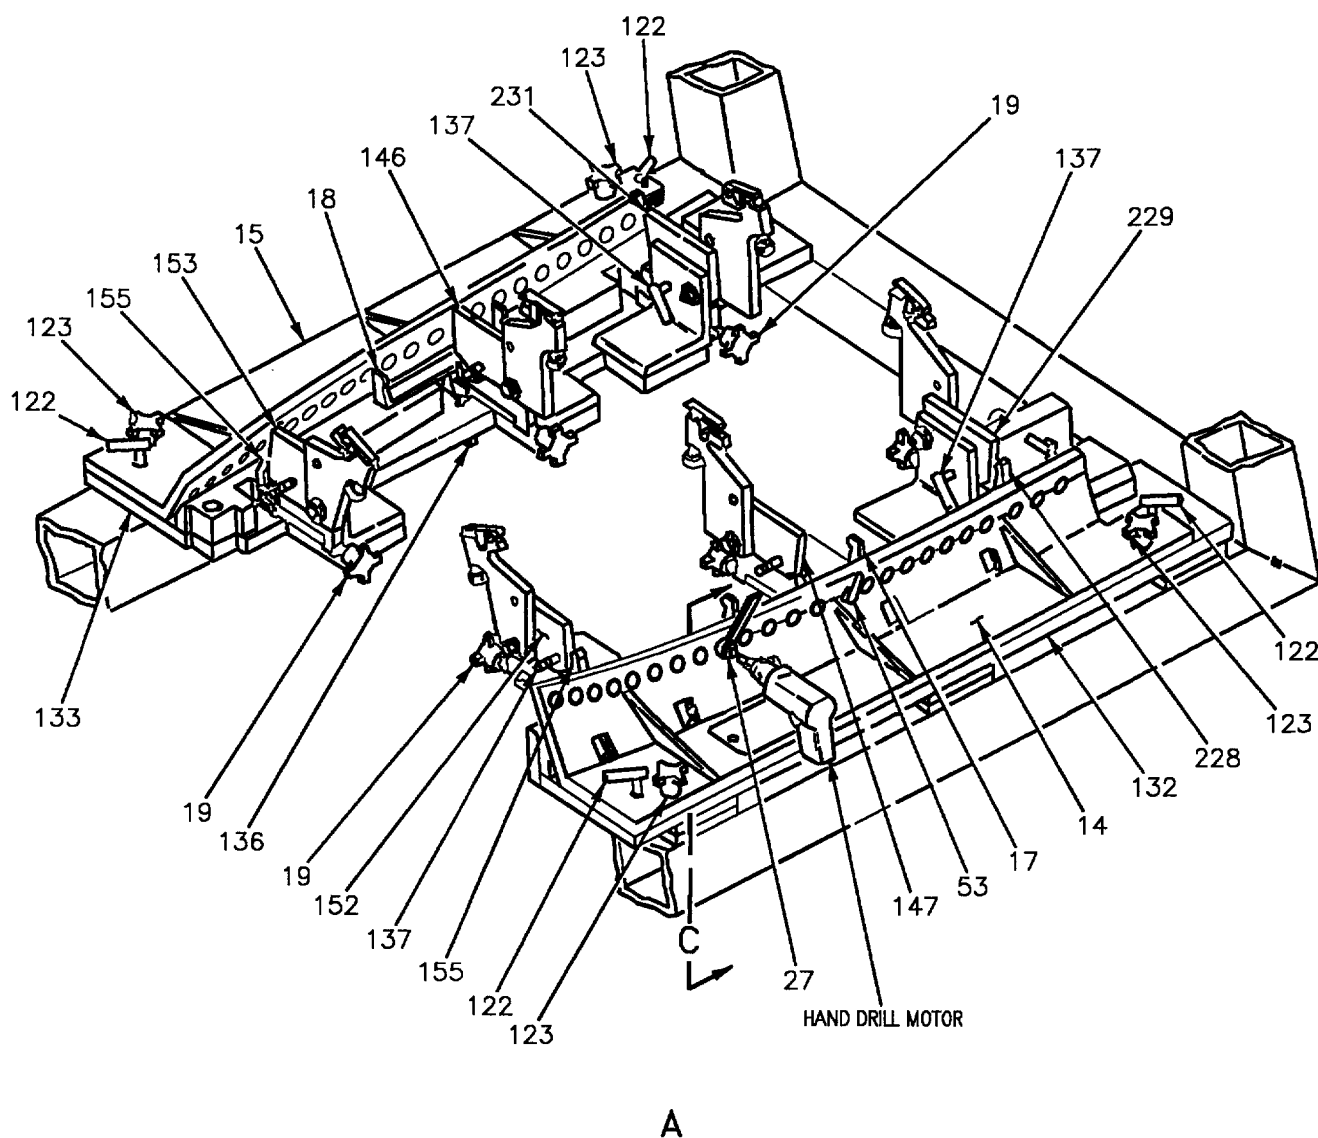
Inspection or Replacement - Inboard Side Frame (Sheet 2)
